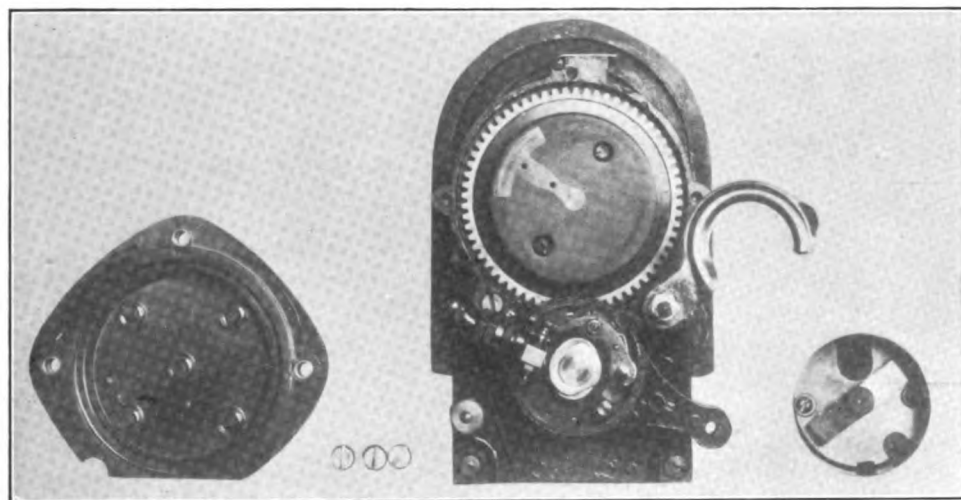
The Distributor Block and Breaker Box Cover Displaced to Show the Arrangements of These Components.
